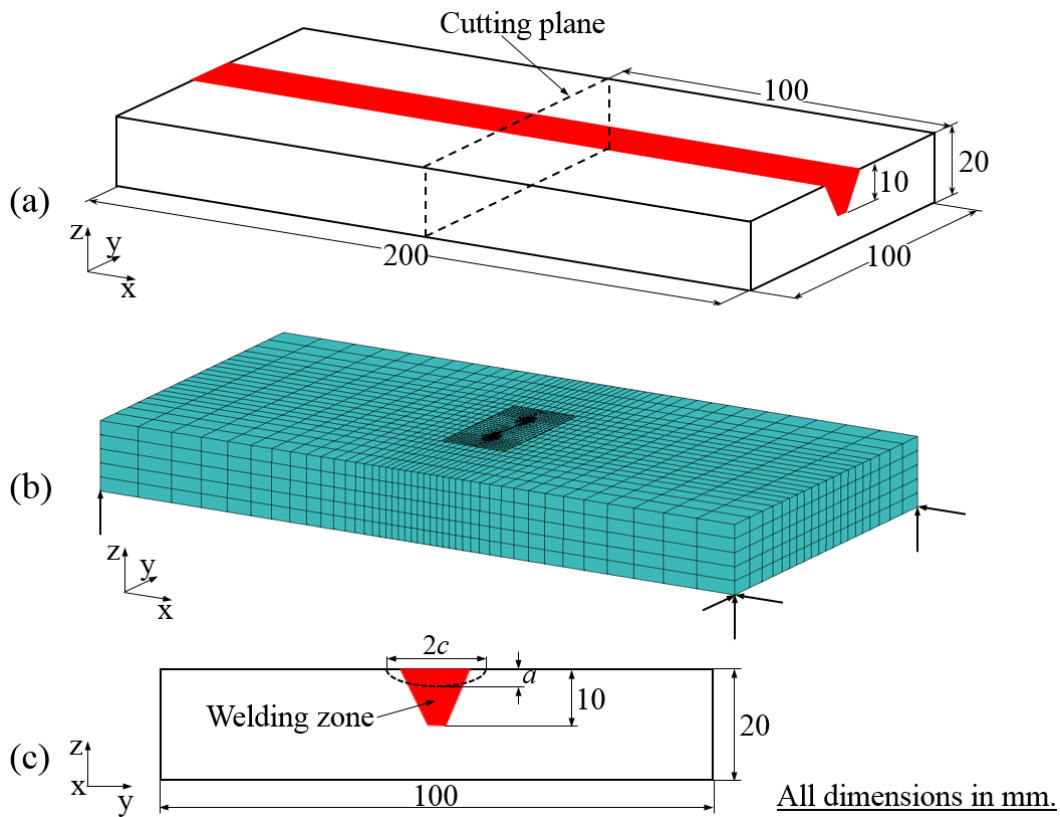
Surface cracked butt-welded joint. (a) geometry of the butt welded joint used by Gadallah et al.^[76], (b) FE butt-welded model with the boundary conditions, and (c) location of the surface crack in the welded joint. (Note: Fig. 4.27(c) taken at the cutting plane).
